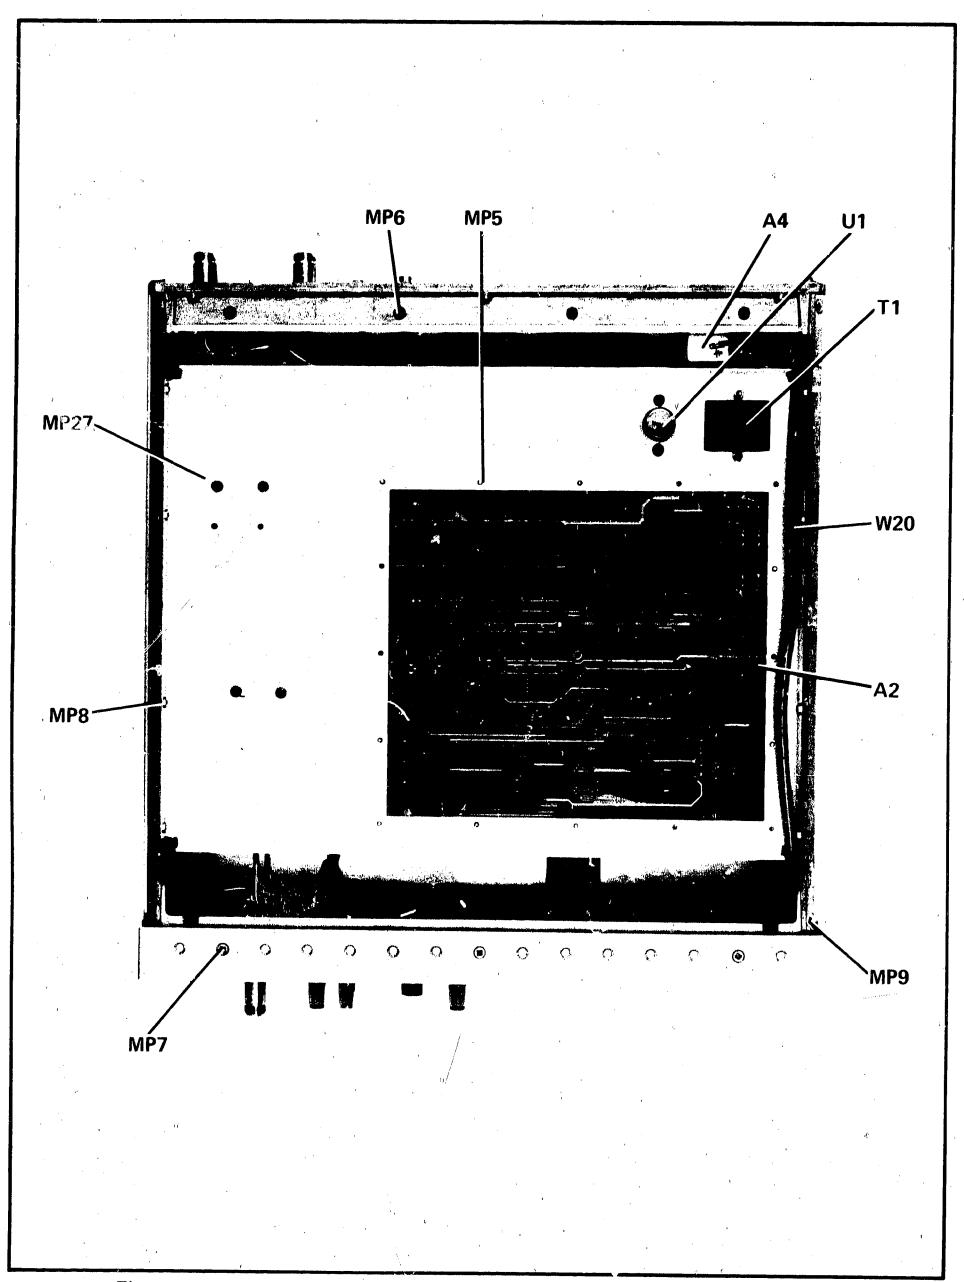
Bottom Chassis Parts, Mechanical Parts, Cable and Assembly Identification
